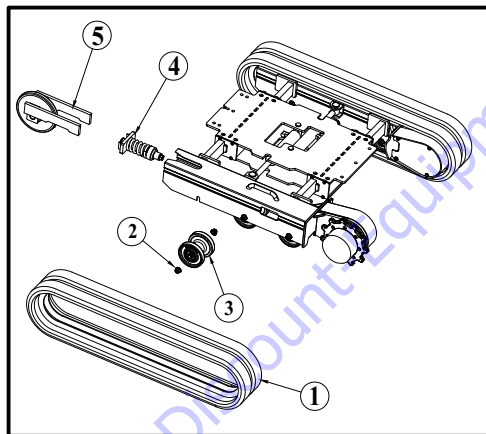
Replacement Roller Lower Wheel And Tracks Adjuster
